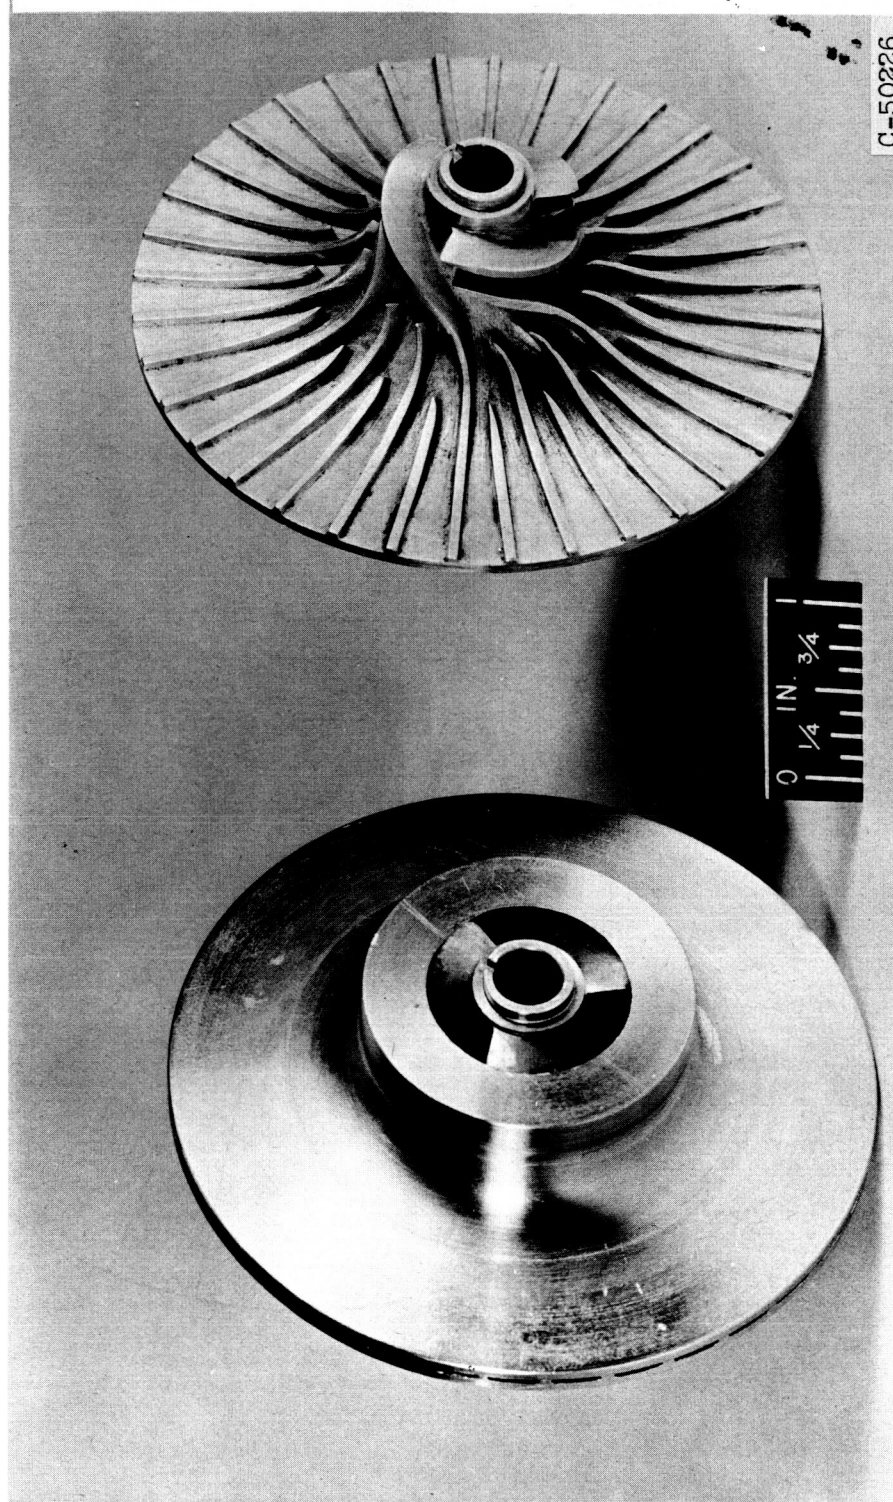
Photograph of shrouded and unshrouded pump impellers.
